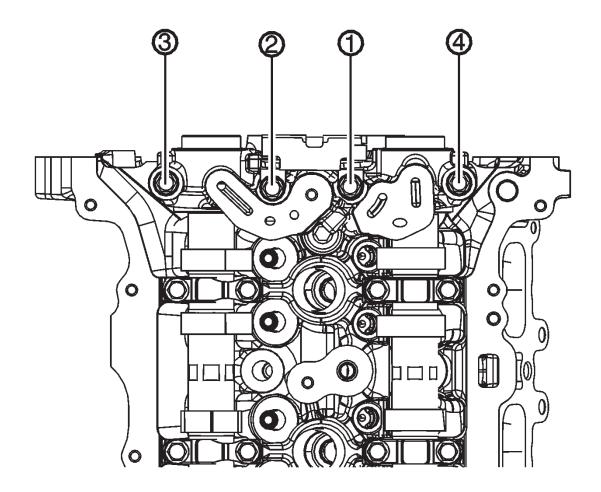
Front Camshaft Cap Bolt Tightening Sequence Courtesy of GENERAL MOTORS COMPANY
